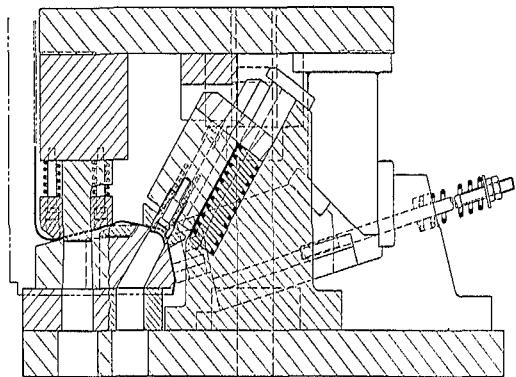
Piercing and embossing backsplash by cam-actuated punches (workpiece shown in Fig. 12-13).
